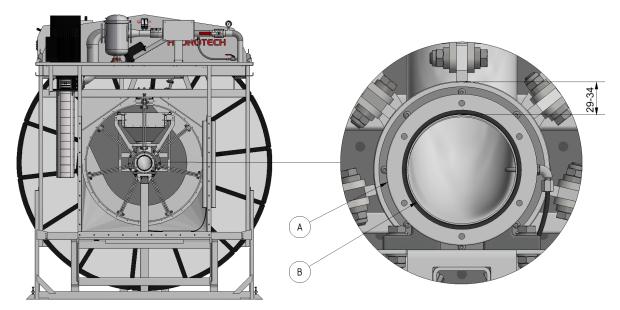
Drum bearing on inlet side. A. Bearing housing B. Shaft
